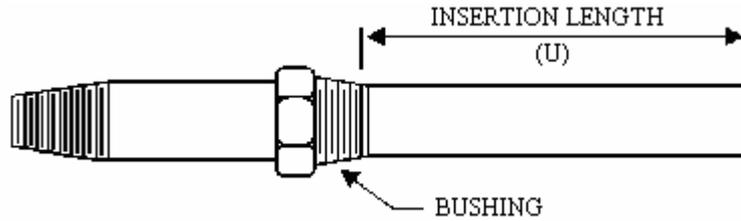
PROTECTING TUBE WITH MOUNTING BUSHING
